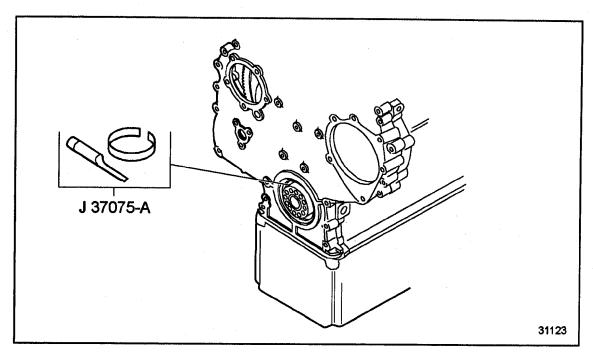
Oil Seal Sleeve Removal Tool for the Federal Mogul Seal
